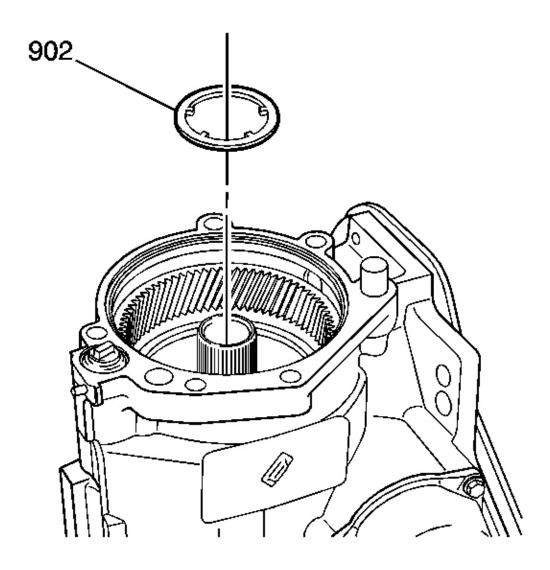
View Of Selective Washer Courtesy of GENERAL MOTORS CORP.
